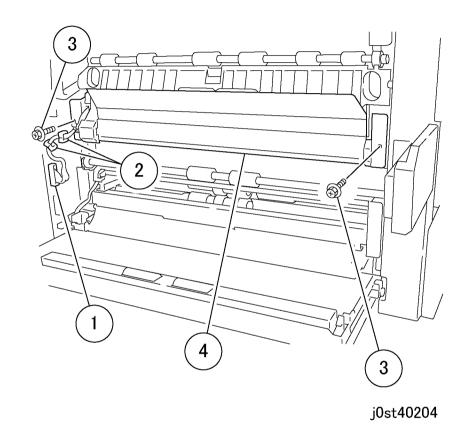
Removing the Feeder 1 Assembly (j0st40204)
